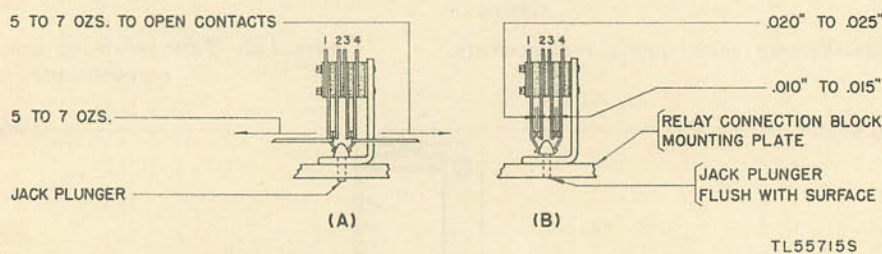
Line and selector circuit-closing jack contact-spring requirements.
